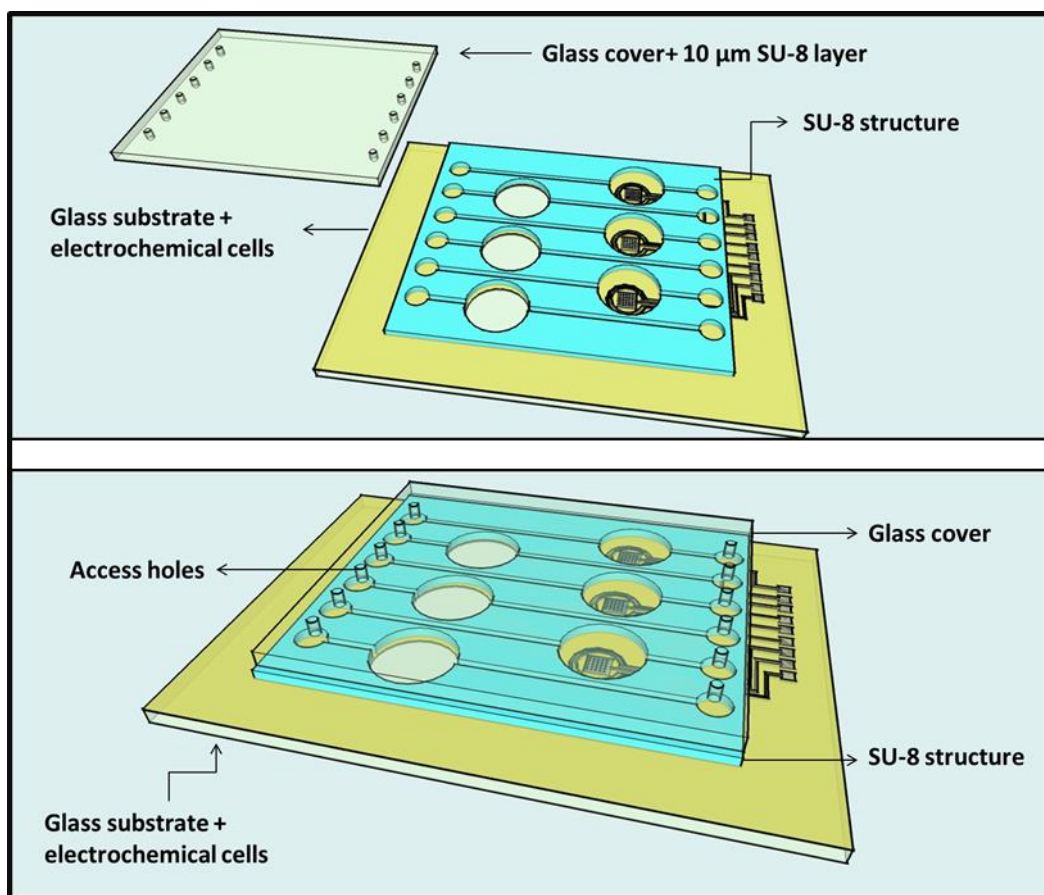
3D model of the component assembly: Bonding of glass cover on underlying fluidic structure.
